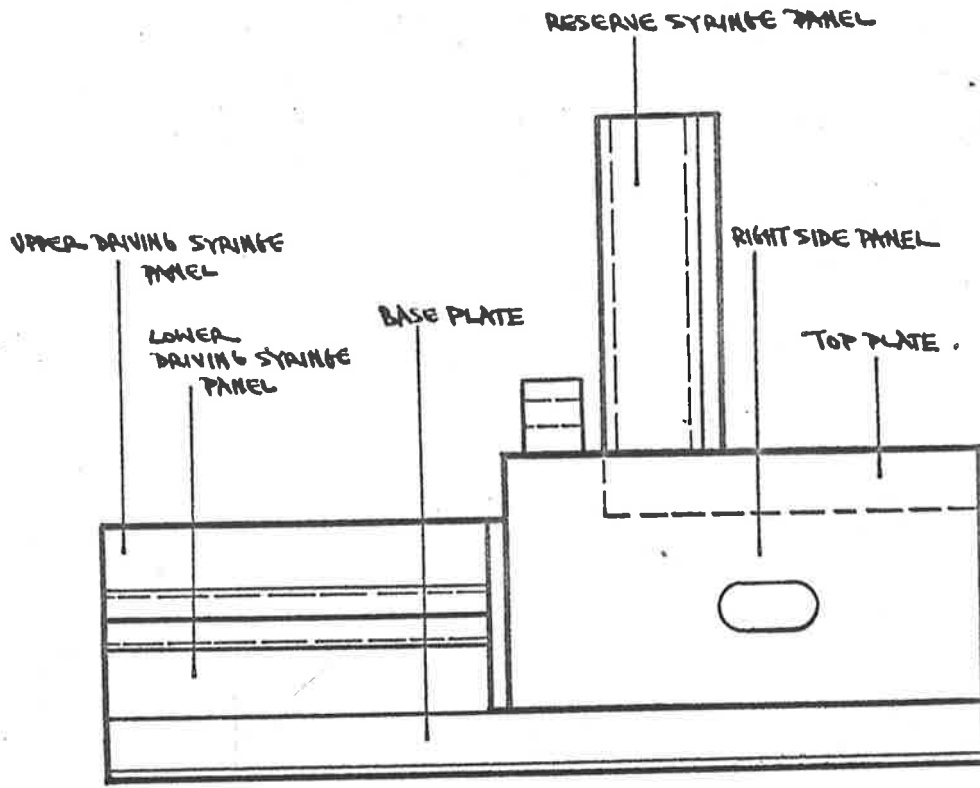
THERMAL PANEL ASSEMBLY.
